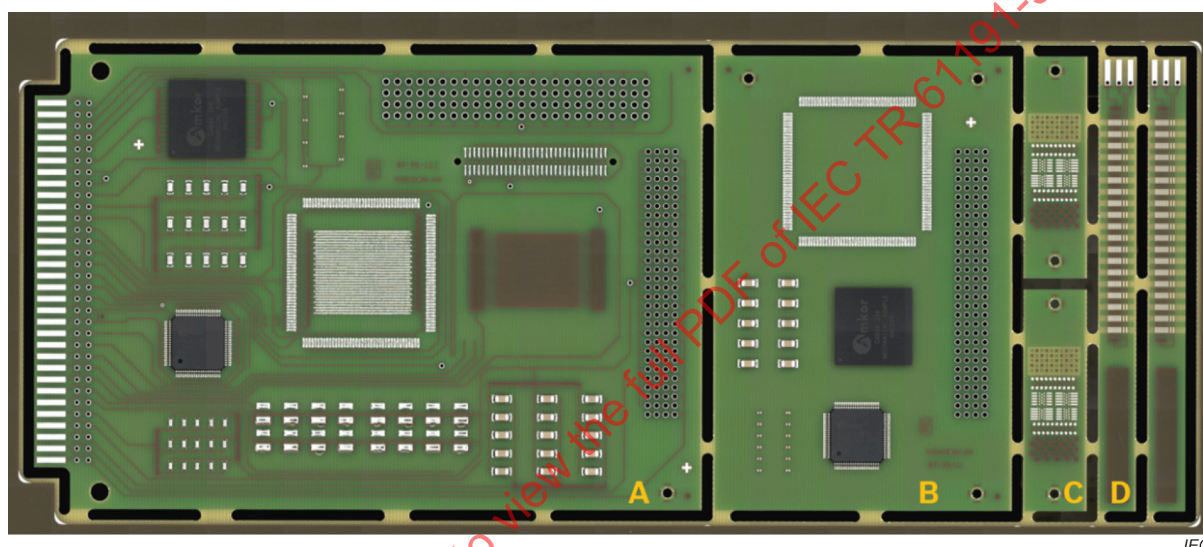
B52 CBA after SMT process, layout slightly adapted to fulfil company internal layout rules
